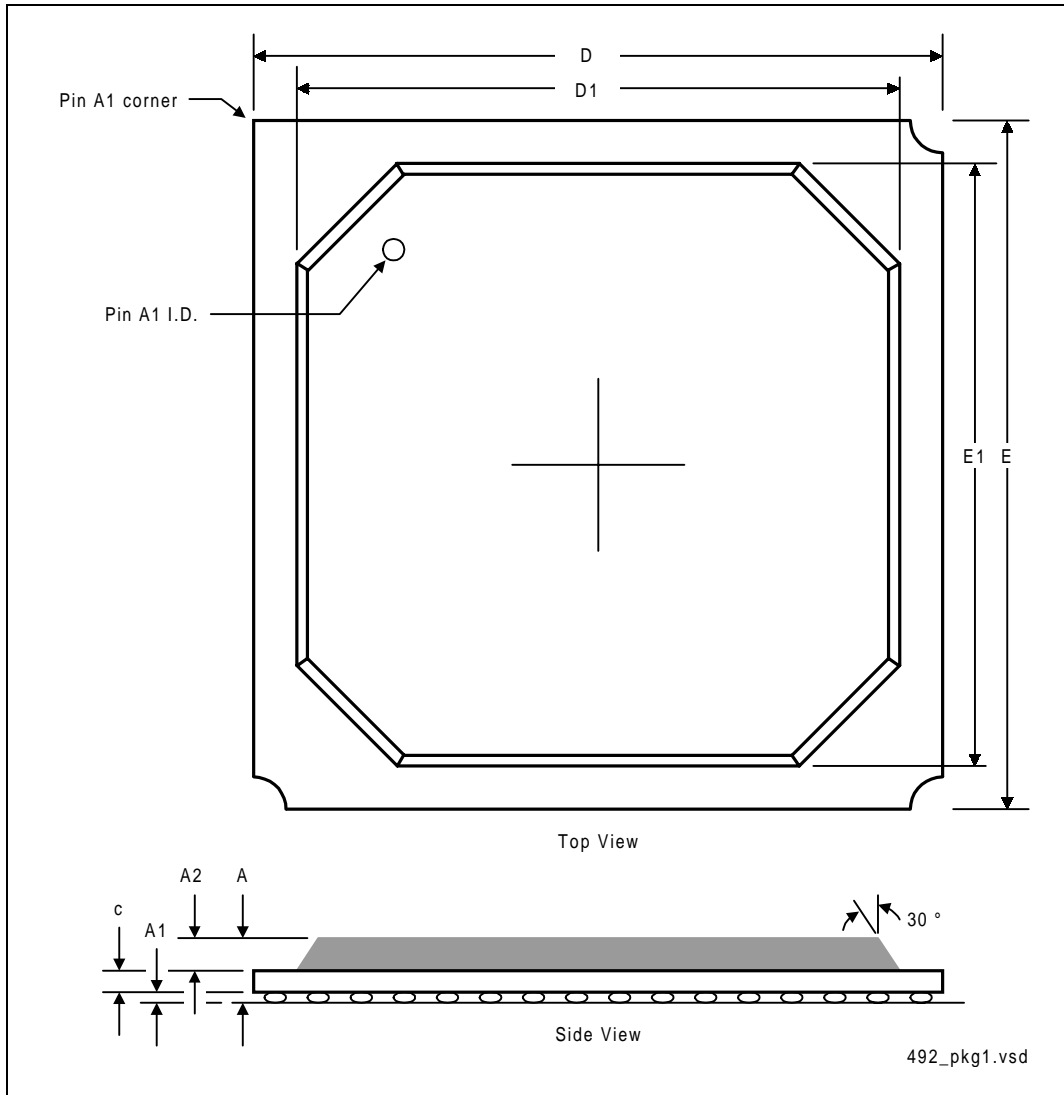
440MX BGA Package Dimensions (Top and Side View)
